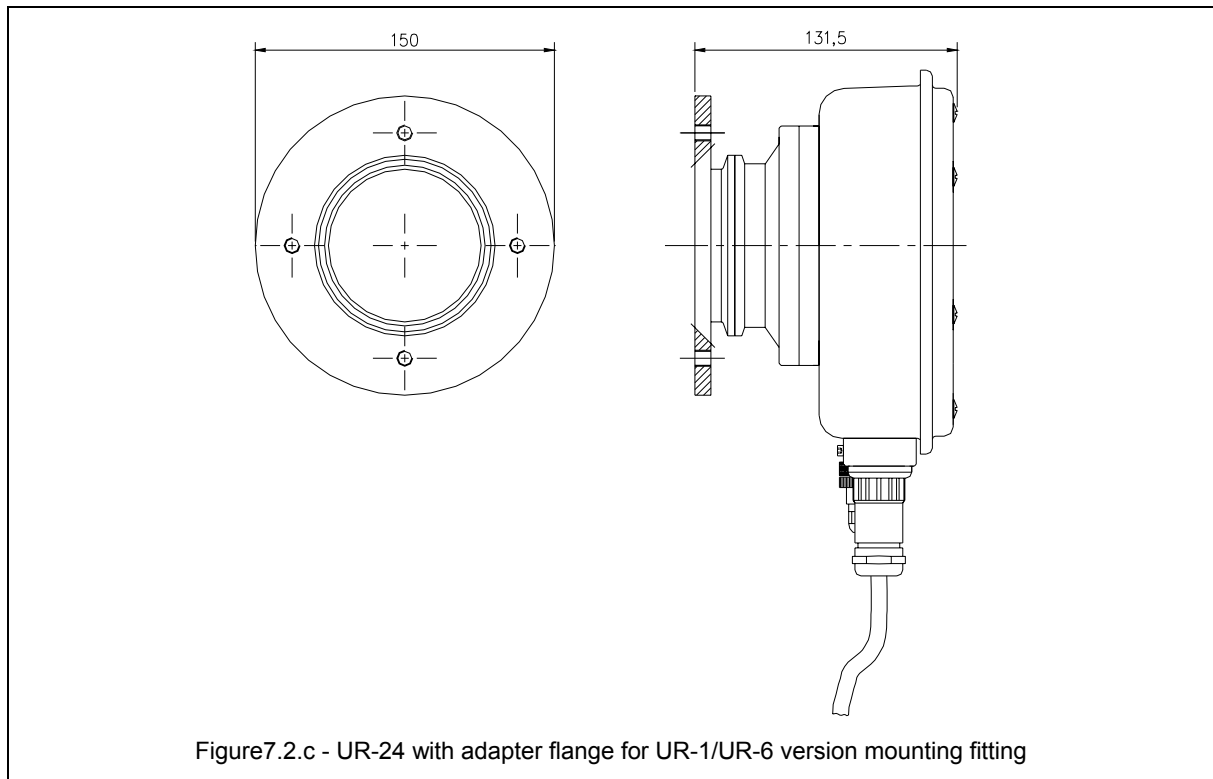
c - UR-24 with adapter flange for UR-1/UR-6 version mounting fitting
